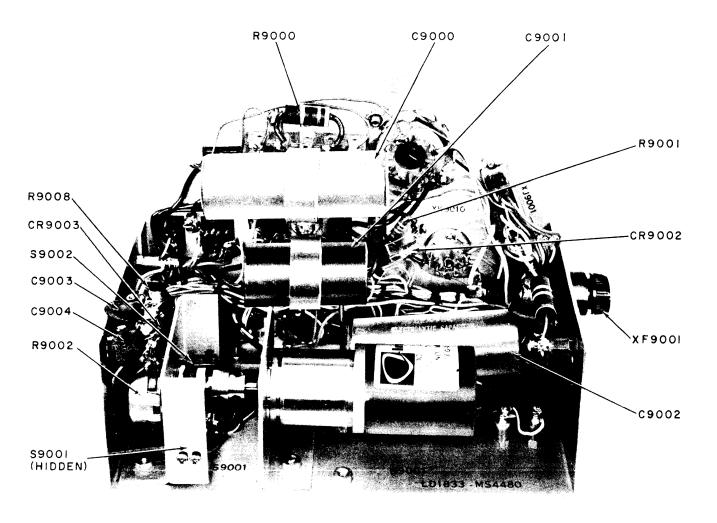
Master Stepping Switch Assembly, Bottom View
